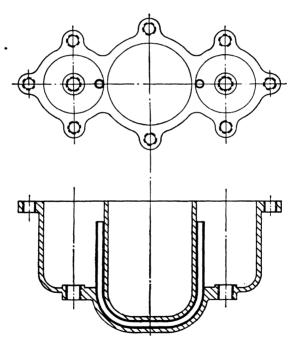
Tubular inserts often are used to form curved holes, as shown here, thus making racking cores or other expensive die devices unnecessary.
